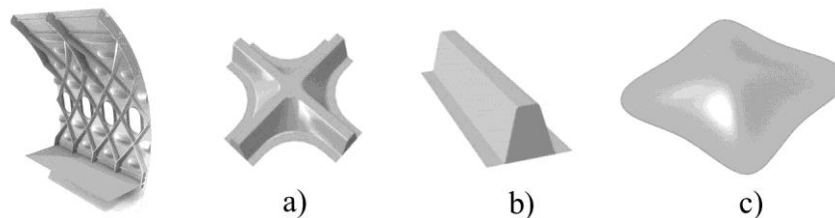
Panel and its components: a) Intersection point. b) Slanted stiffener. c) Stiffener peak
